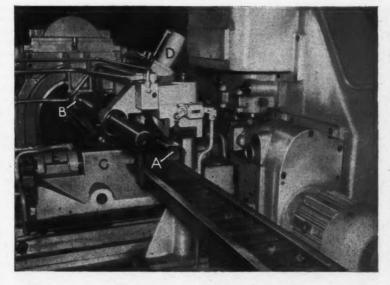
At the loading station of the bearing cap machine, the casting is moved into a portion of the transfer track carried on a slide, clamped, and fed transversely to the milling cutters on the housing at the right
